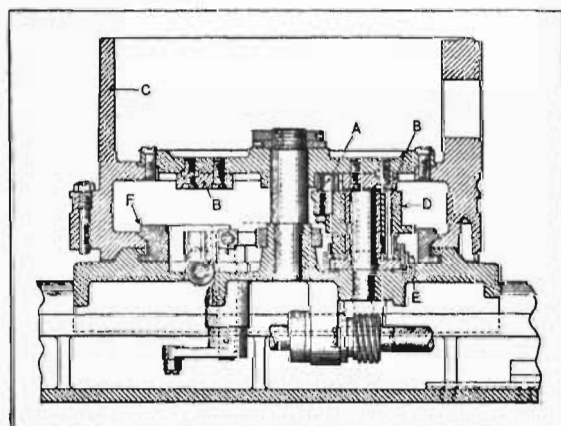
Another Turret Indexing Mechanism of the Geneva Type
